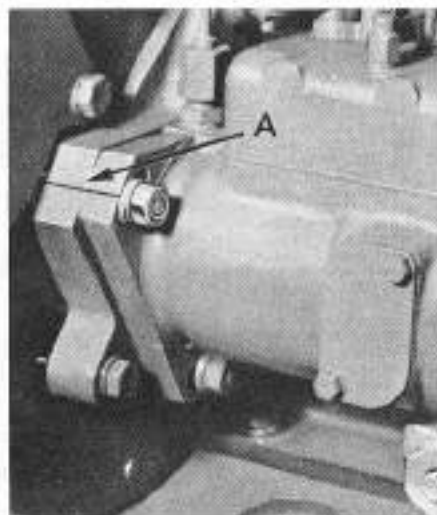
View showing C.A.V. fuel injection pump timing marks. Model 990 with 4/47 engine is shown; timing marks for other engines are similar.
